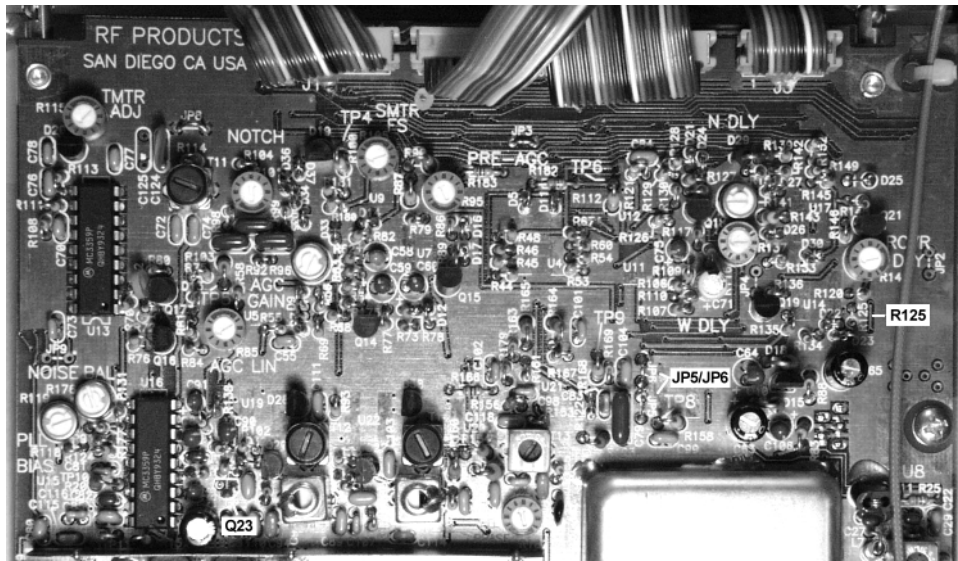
Modified DFP/DFR-1000 IF Board (component side)
